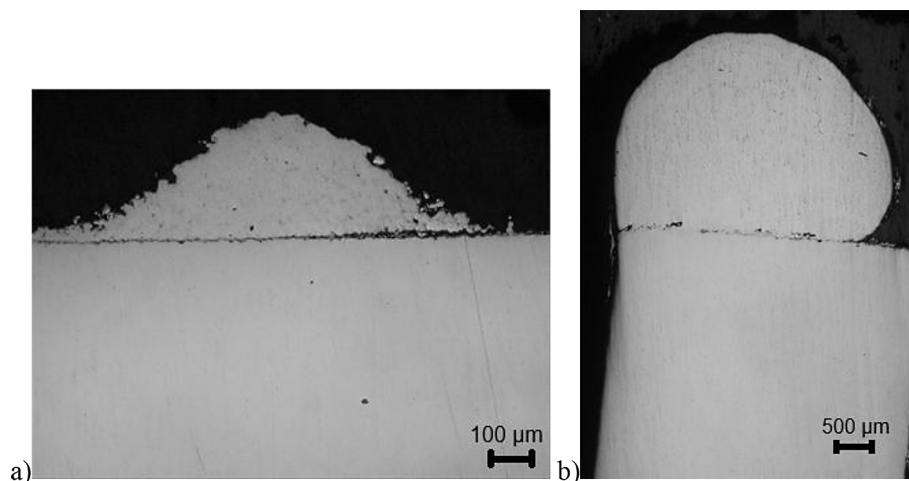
General view of sprayed (a) and remelted (b) Inconel 82 coating (before etching)
